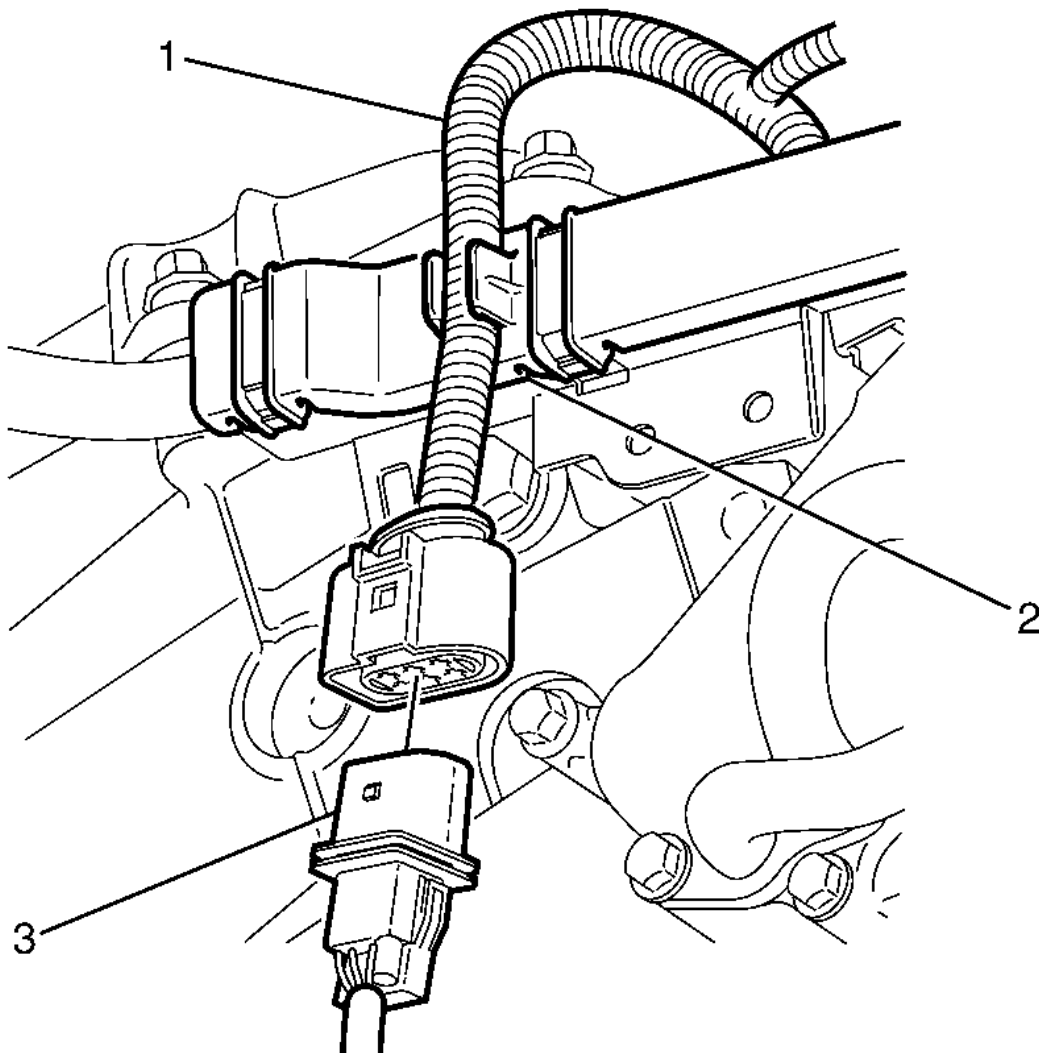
Identifying Engine Wiring Harness Bracket To Cylinder Head Retaining Bolts
